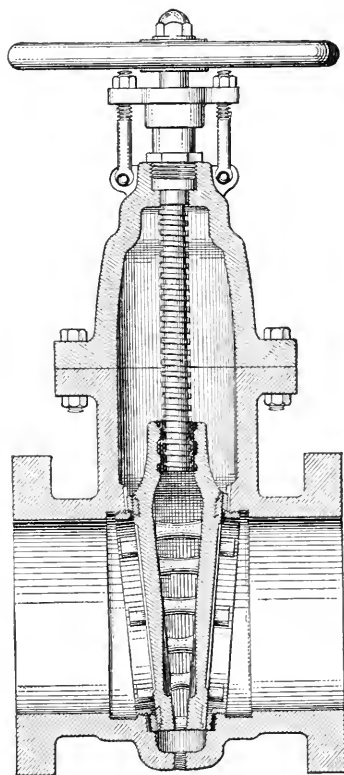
IRON BODY GATE VALVE WITH RENEWABLE SEAT RINGS.
